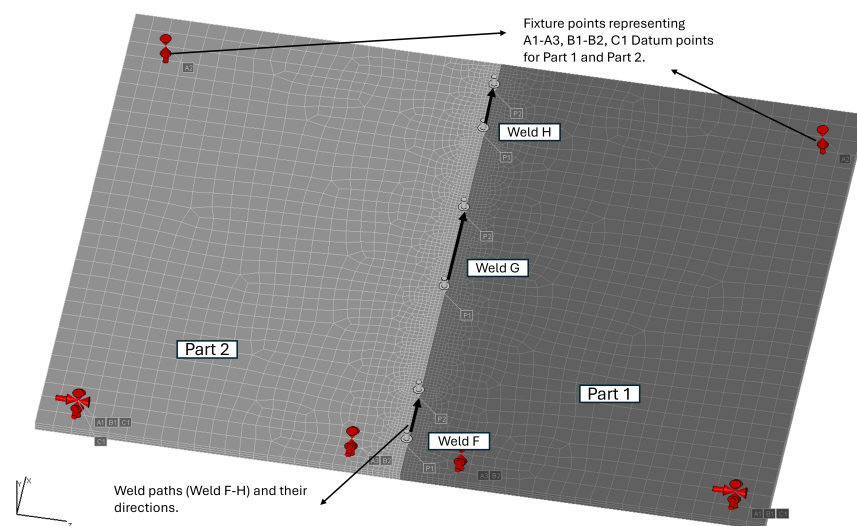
Assembly I—assembly of two INCONEL 718 metal plates with three weld segments F, G, and H.
